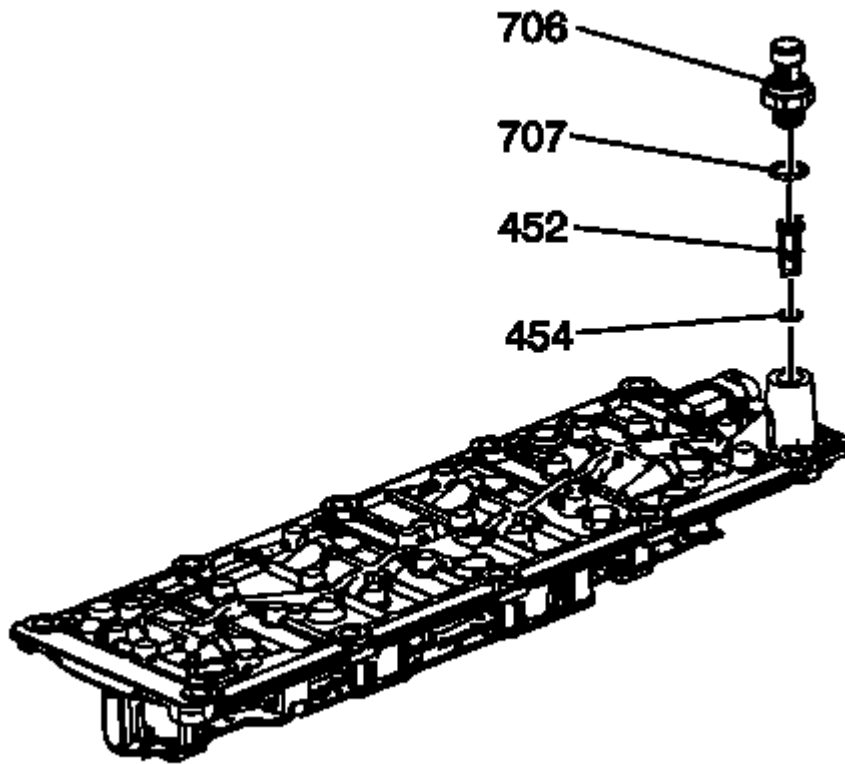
View Of Oil Pressure Sensor, Washer And Valve Lifter Oil Filter
